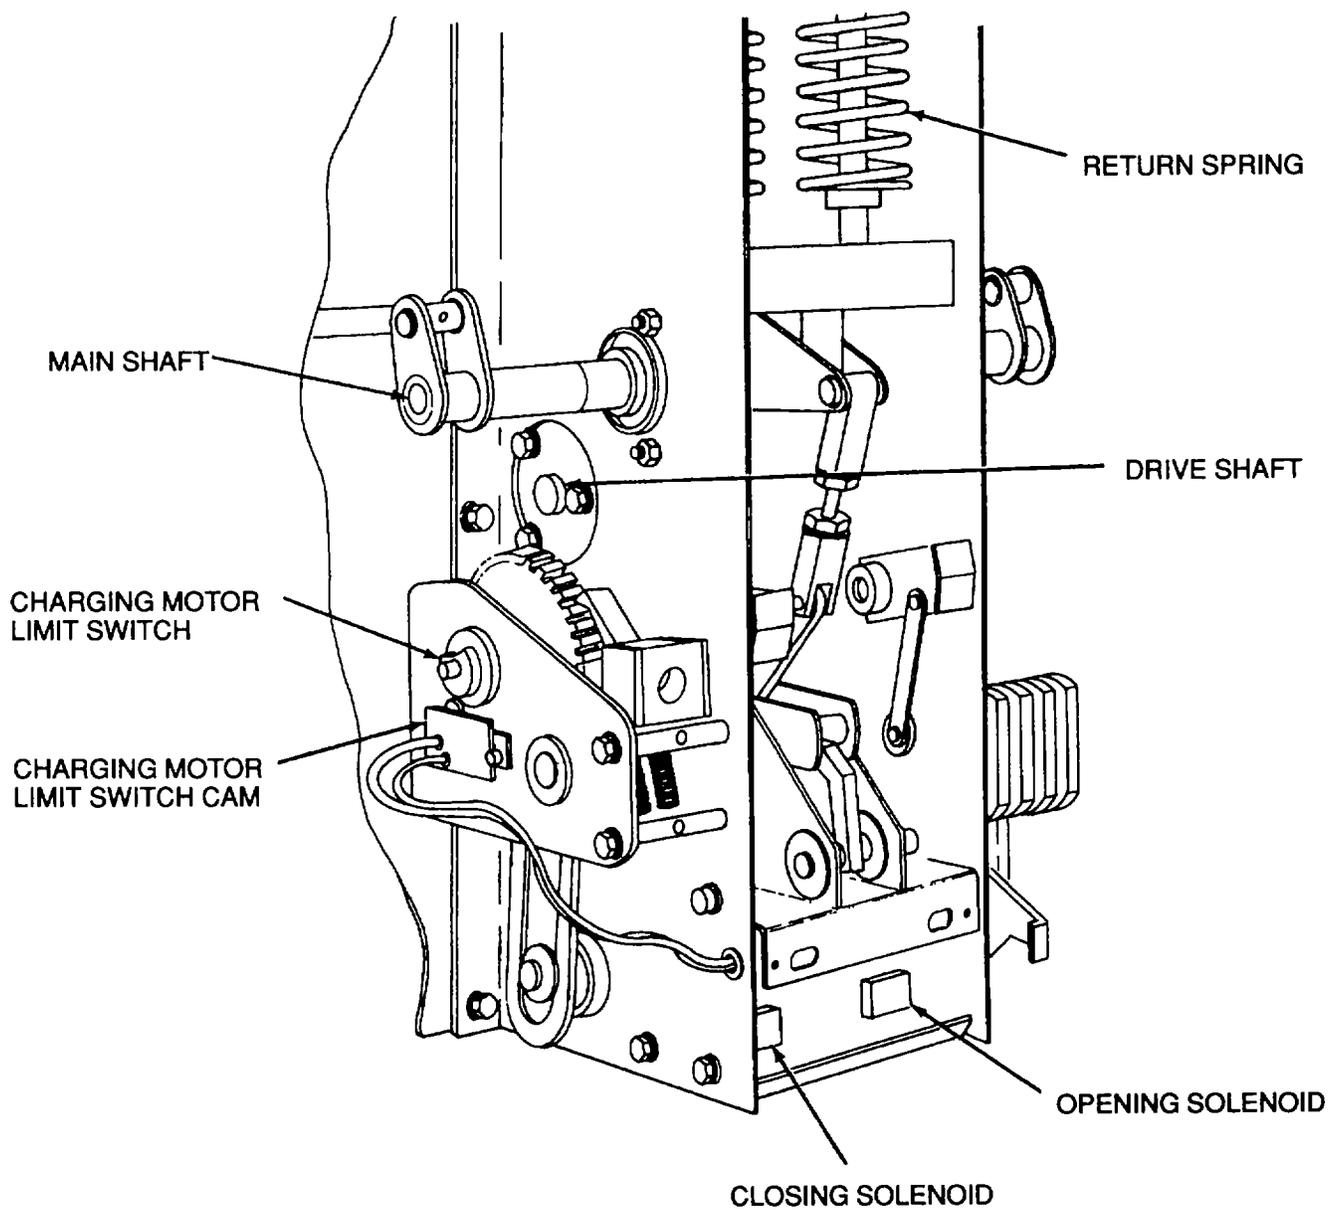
Load Circuit Breaker CB101, Front Left Side Interior View
